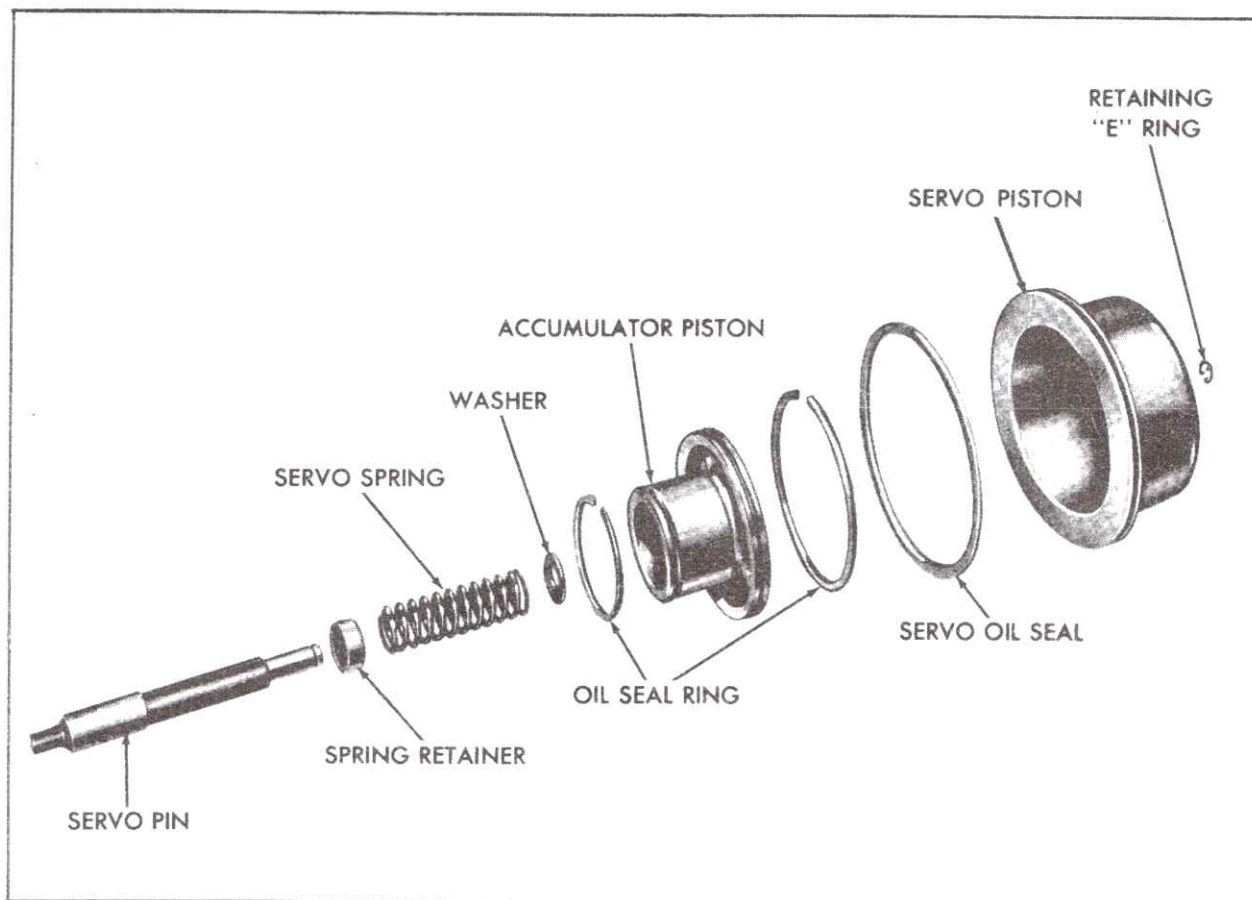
Rear Servo and Accumulator Assembly Disassembled
